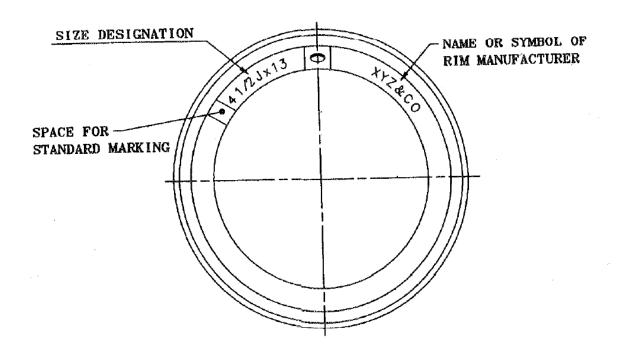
EXAMPLE OF OUTER SIDE RIM MARK
